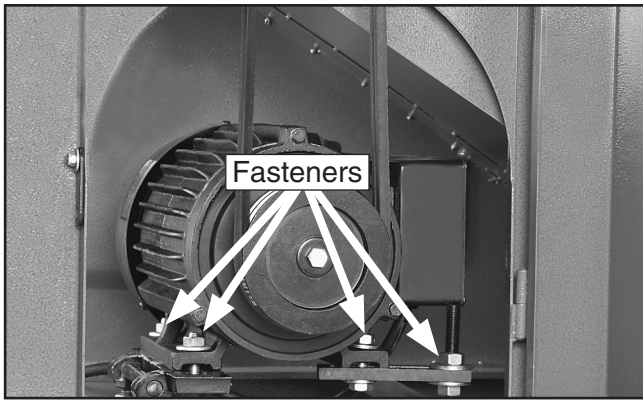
Motor mount fasteners for adjusting pulley alignment.
